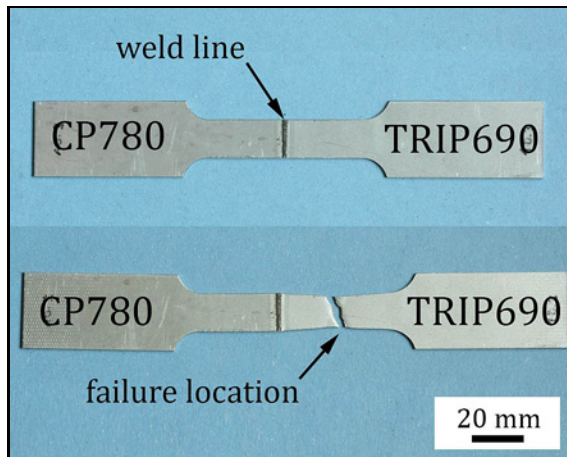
Tensile sample of fibre laser welded joint of CP780 and TRIP690 steel before and after the tensile test.
